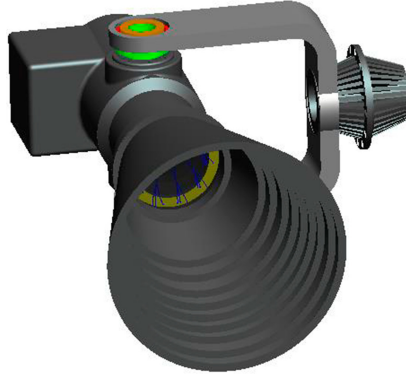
Hosted payload with two-dimensional rotational machine collocated.
